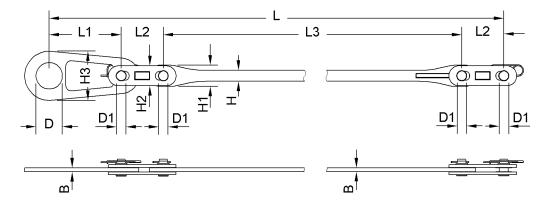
Dimensions of jib pendant strap on 1916 jib head section
